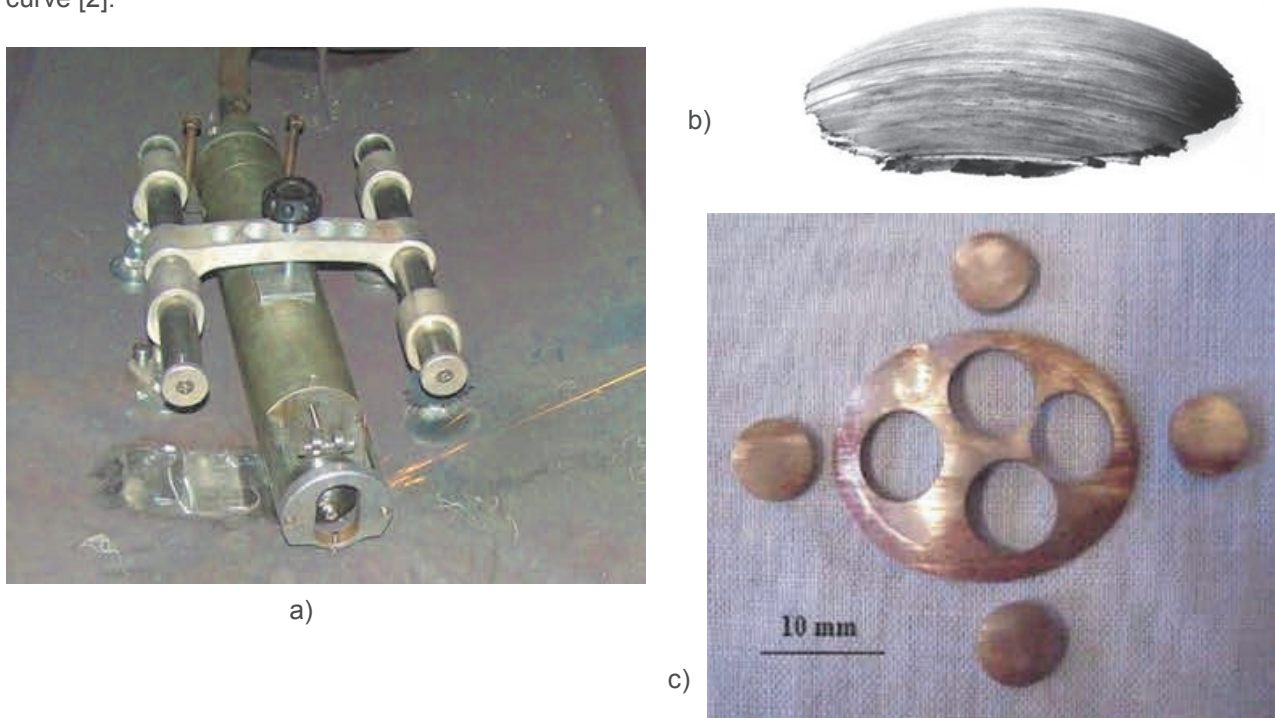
Specimen removal by sampling machine SSam TM² (a), specimen removed from the component (b), test discs cut from the specimen (c)
